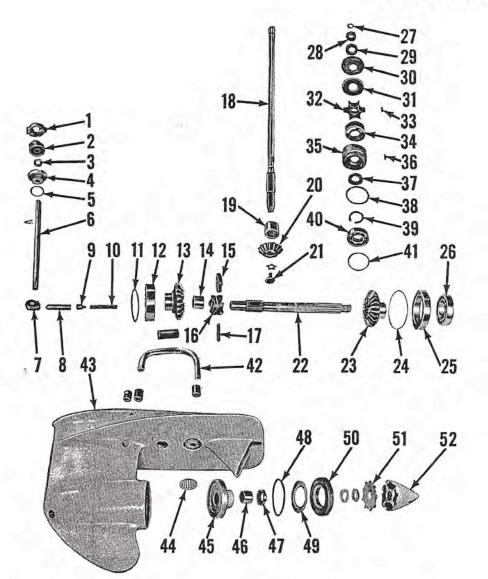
Exploded view of gearcase assembly used on Four Cylinder models.
